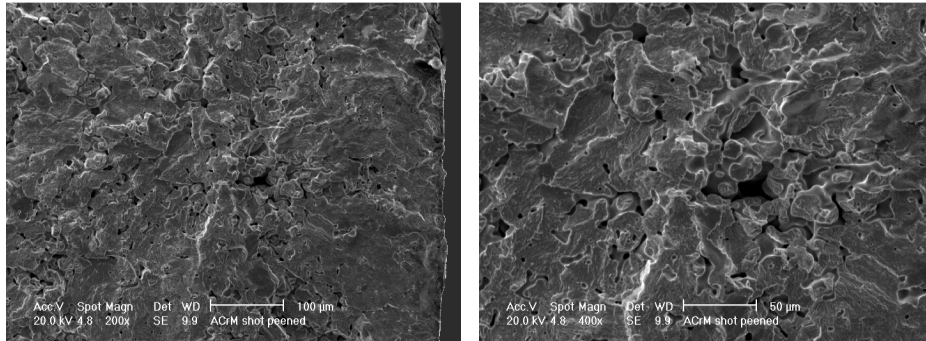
fracture surface of the D shot peened specimen
